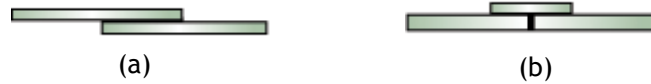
(a) Single lap joint; (b)Single strap joint [28]
